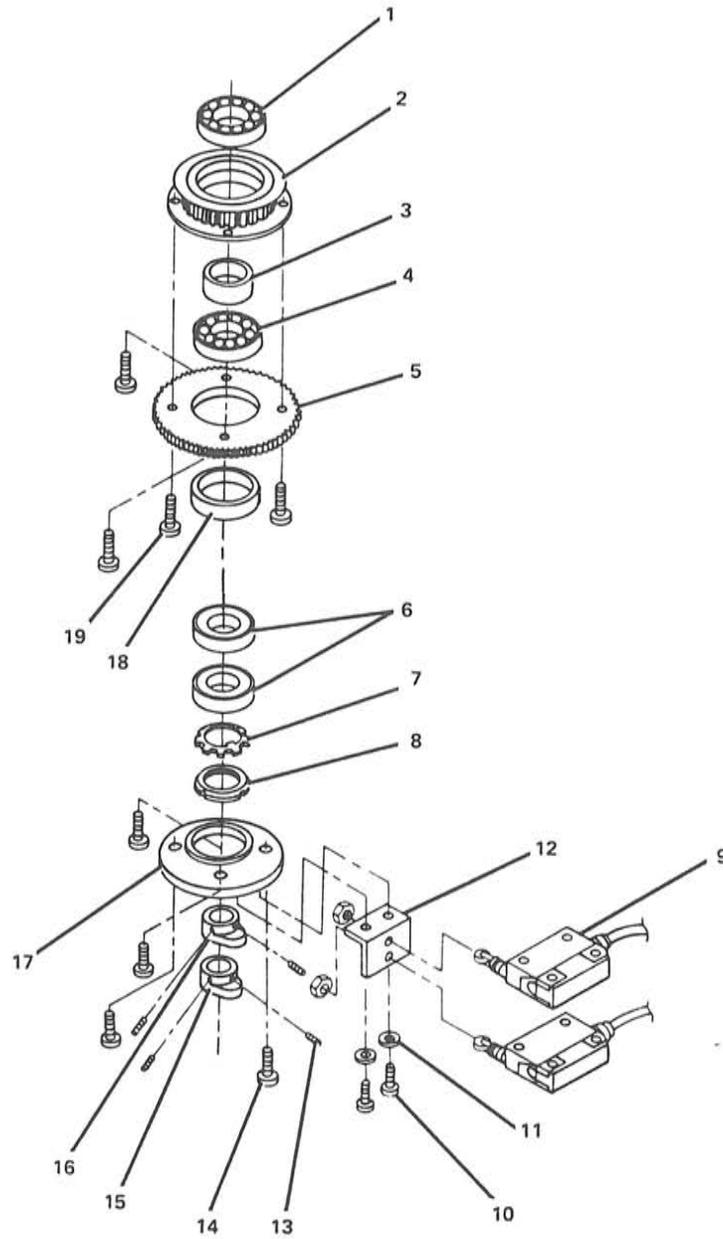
THETA ONE ASSEMBLY. SEE LIST 4.
